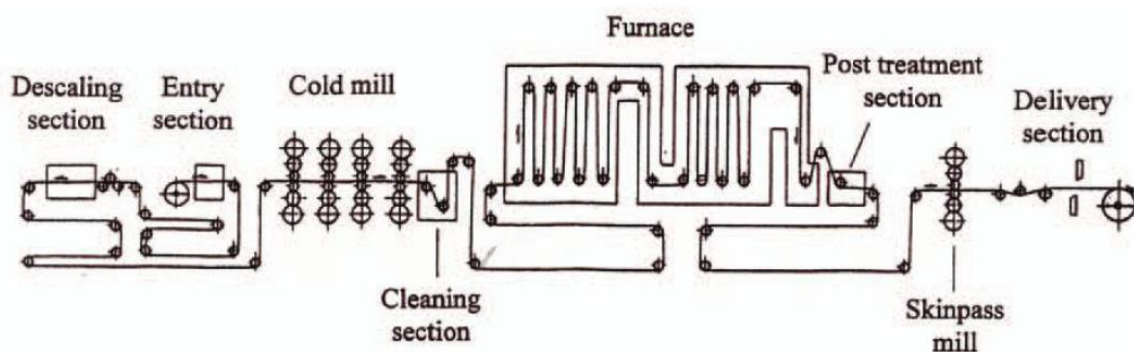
Cold rolling mill with heat treatment furnace. [12]
